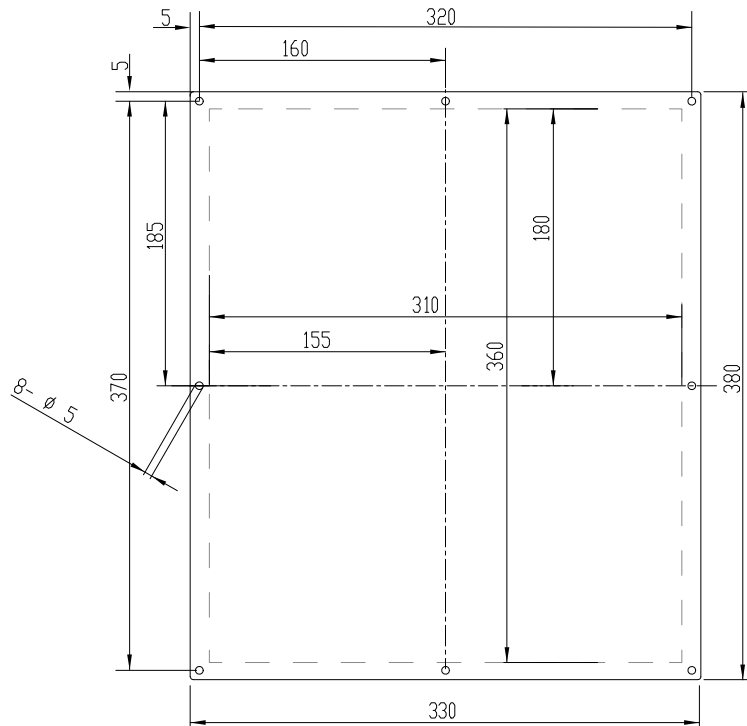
Sheet Metal Cabinet Suggested Cutout Mounting Dimensions Drawing - N5 All-in-One
